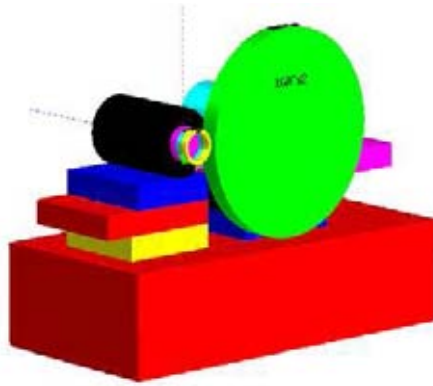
A model of the grinding machine including most of the parts of the machine.
